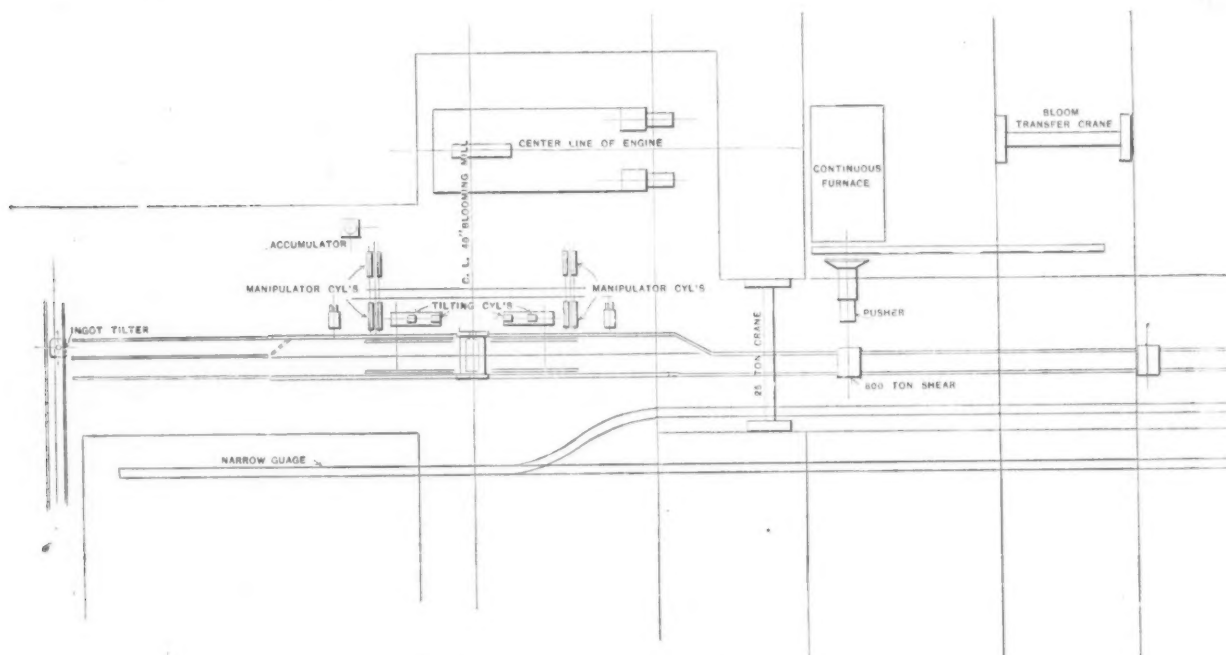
Diagrammatic Plan of the 40-In. Blooming Mill and Accessories.
